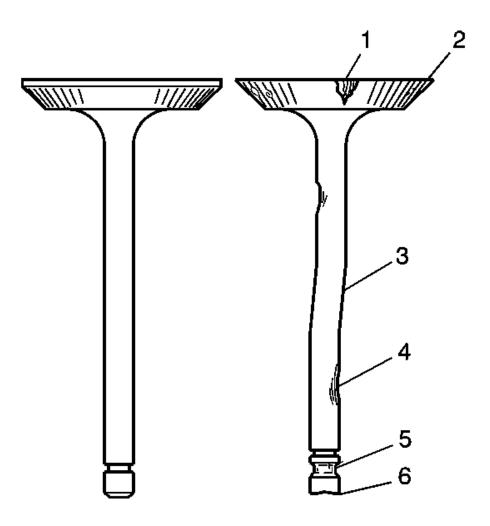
Identifying Inspection Points For Valves Damage Courtesy of GENERAL MOTORS COMPANY
